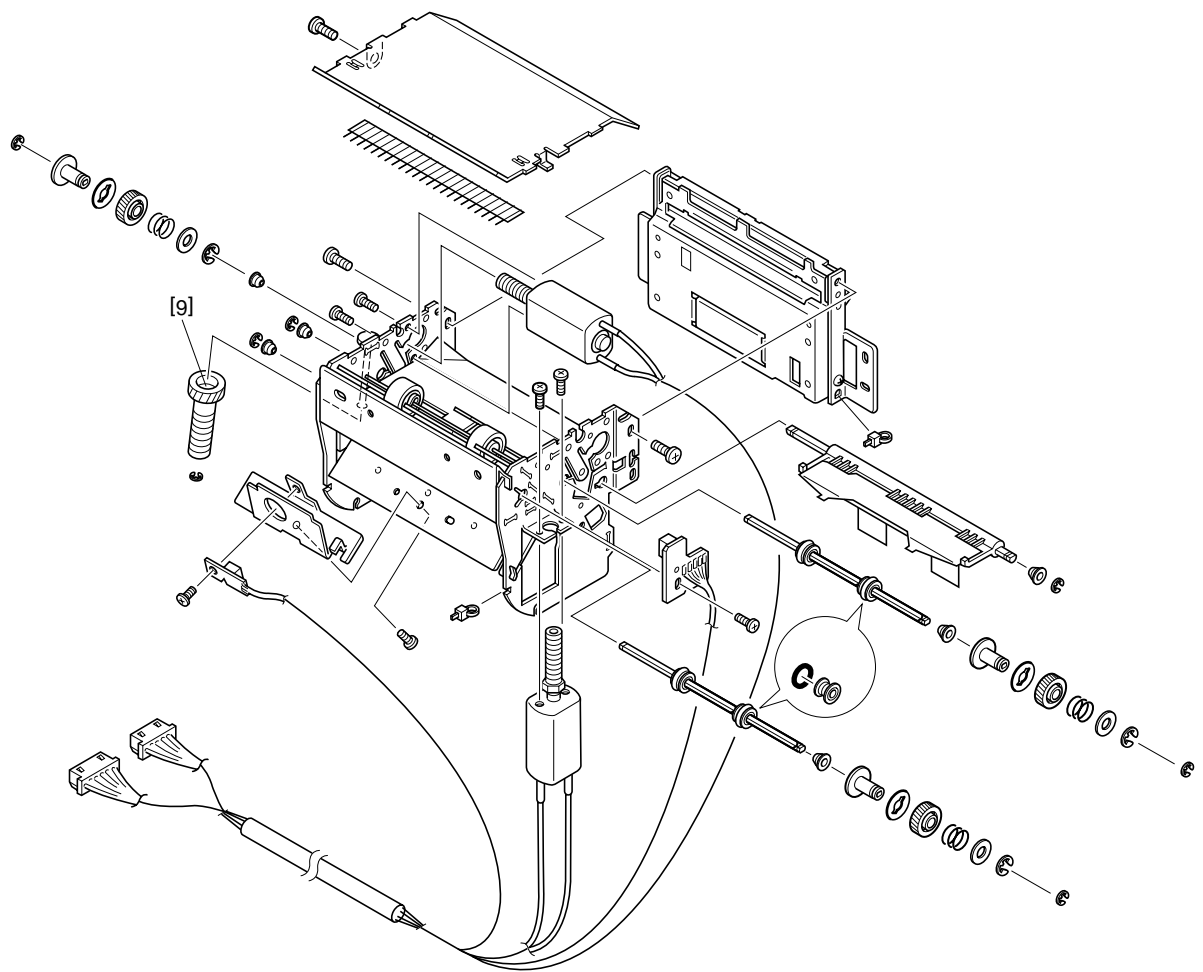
Lubrication Points (TUP492 Presenter-Assembly)
